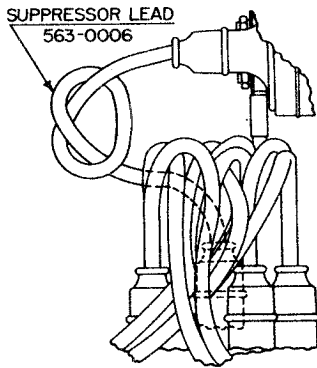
DISTRIBUTOR SUPPRESSOR LEAD 563-0006
